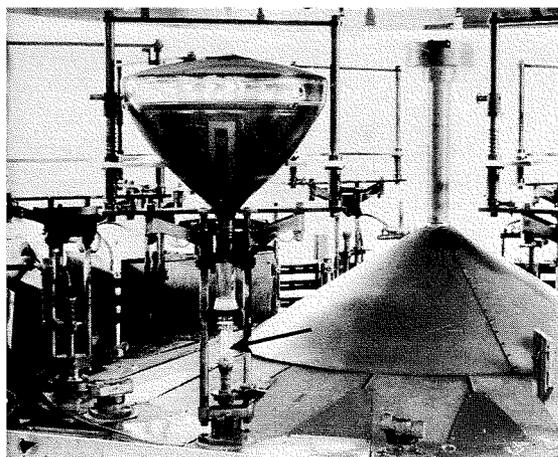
Machine for sealing the electron-gun assembly, or "mount" (arrow), to the envelope, prior to exhaust.
